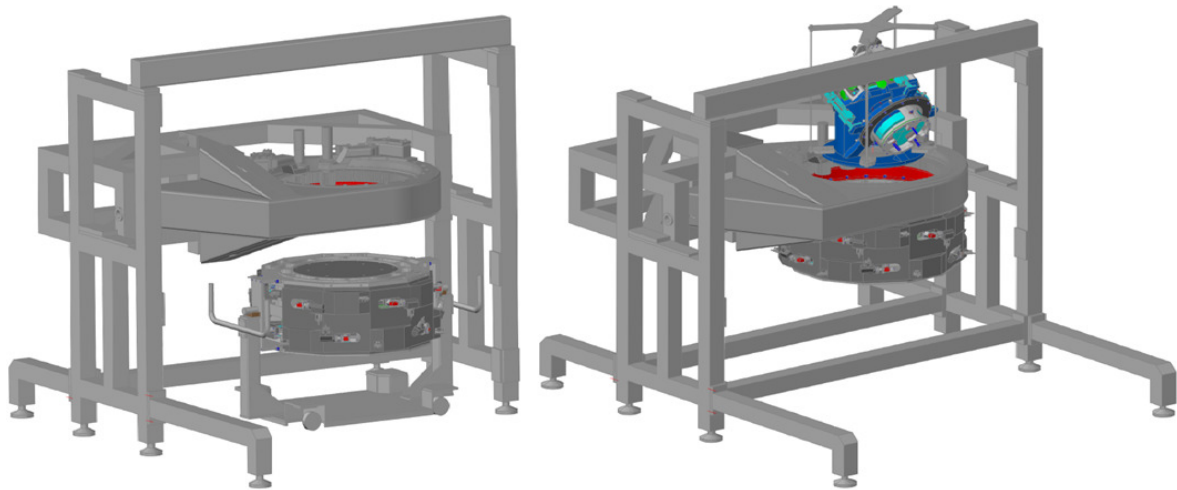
Left*: the GWS lower part, placed under the carbon fiber arm, to be lifted and fixed to the bearing. *Right*: the PR-I is lowered on the carbon fiber arm.
